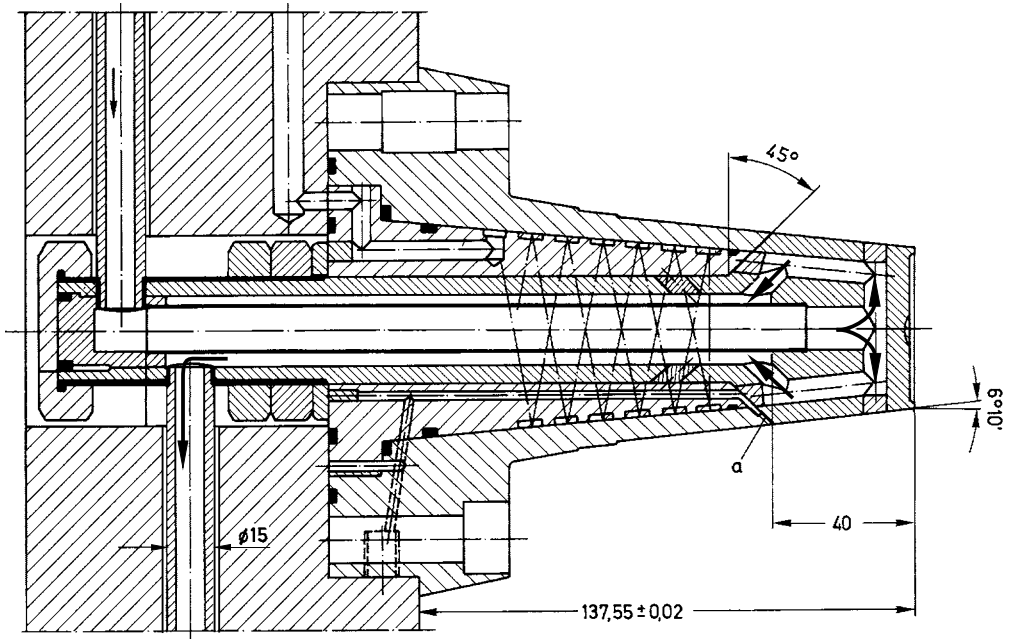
and 3 Two-cavity injection mold for loudspeaker grilles
